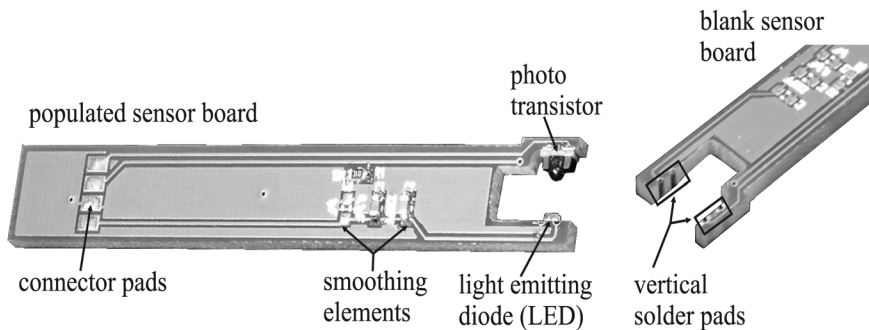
Sensor PCB including the fork structure, featuring the vertical solder pads.
